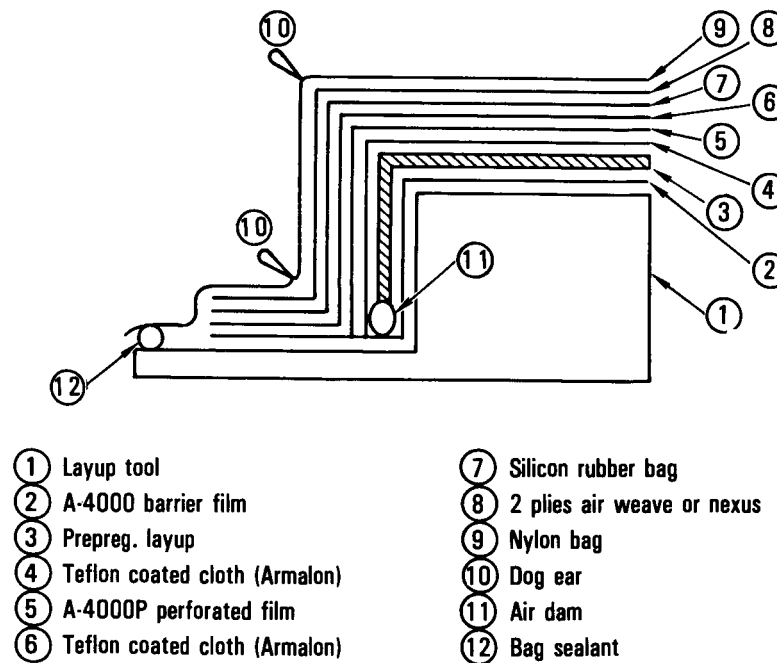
Actuator and truss rib bleeder stacking arrangement.
